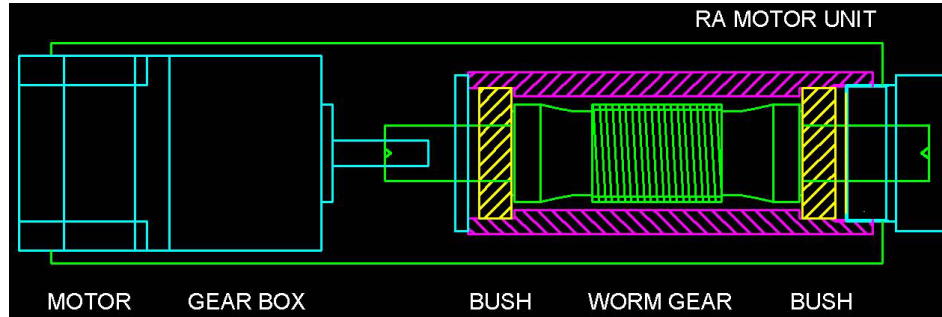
Sketch of the RA Motor unit. The RA Motor rotates the worm gear directly. This worm gear is supported with two bushes, which are made by gunmetal.
